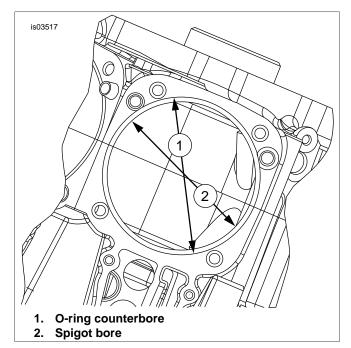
Spigot Bore and O-Ring Counterbore Dimensions
